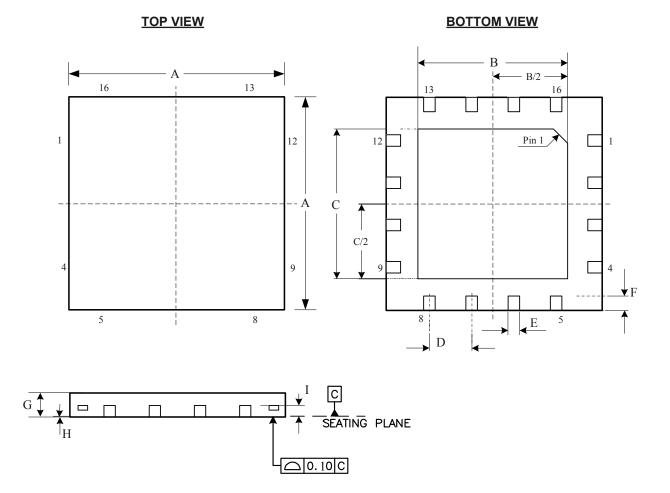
16 Pin QFN Package (4 x 4 mm)
